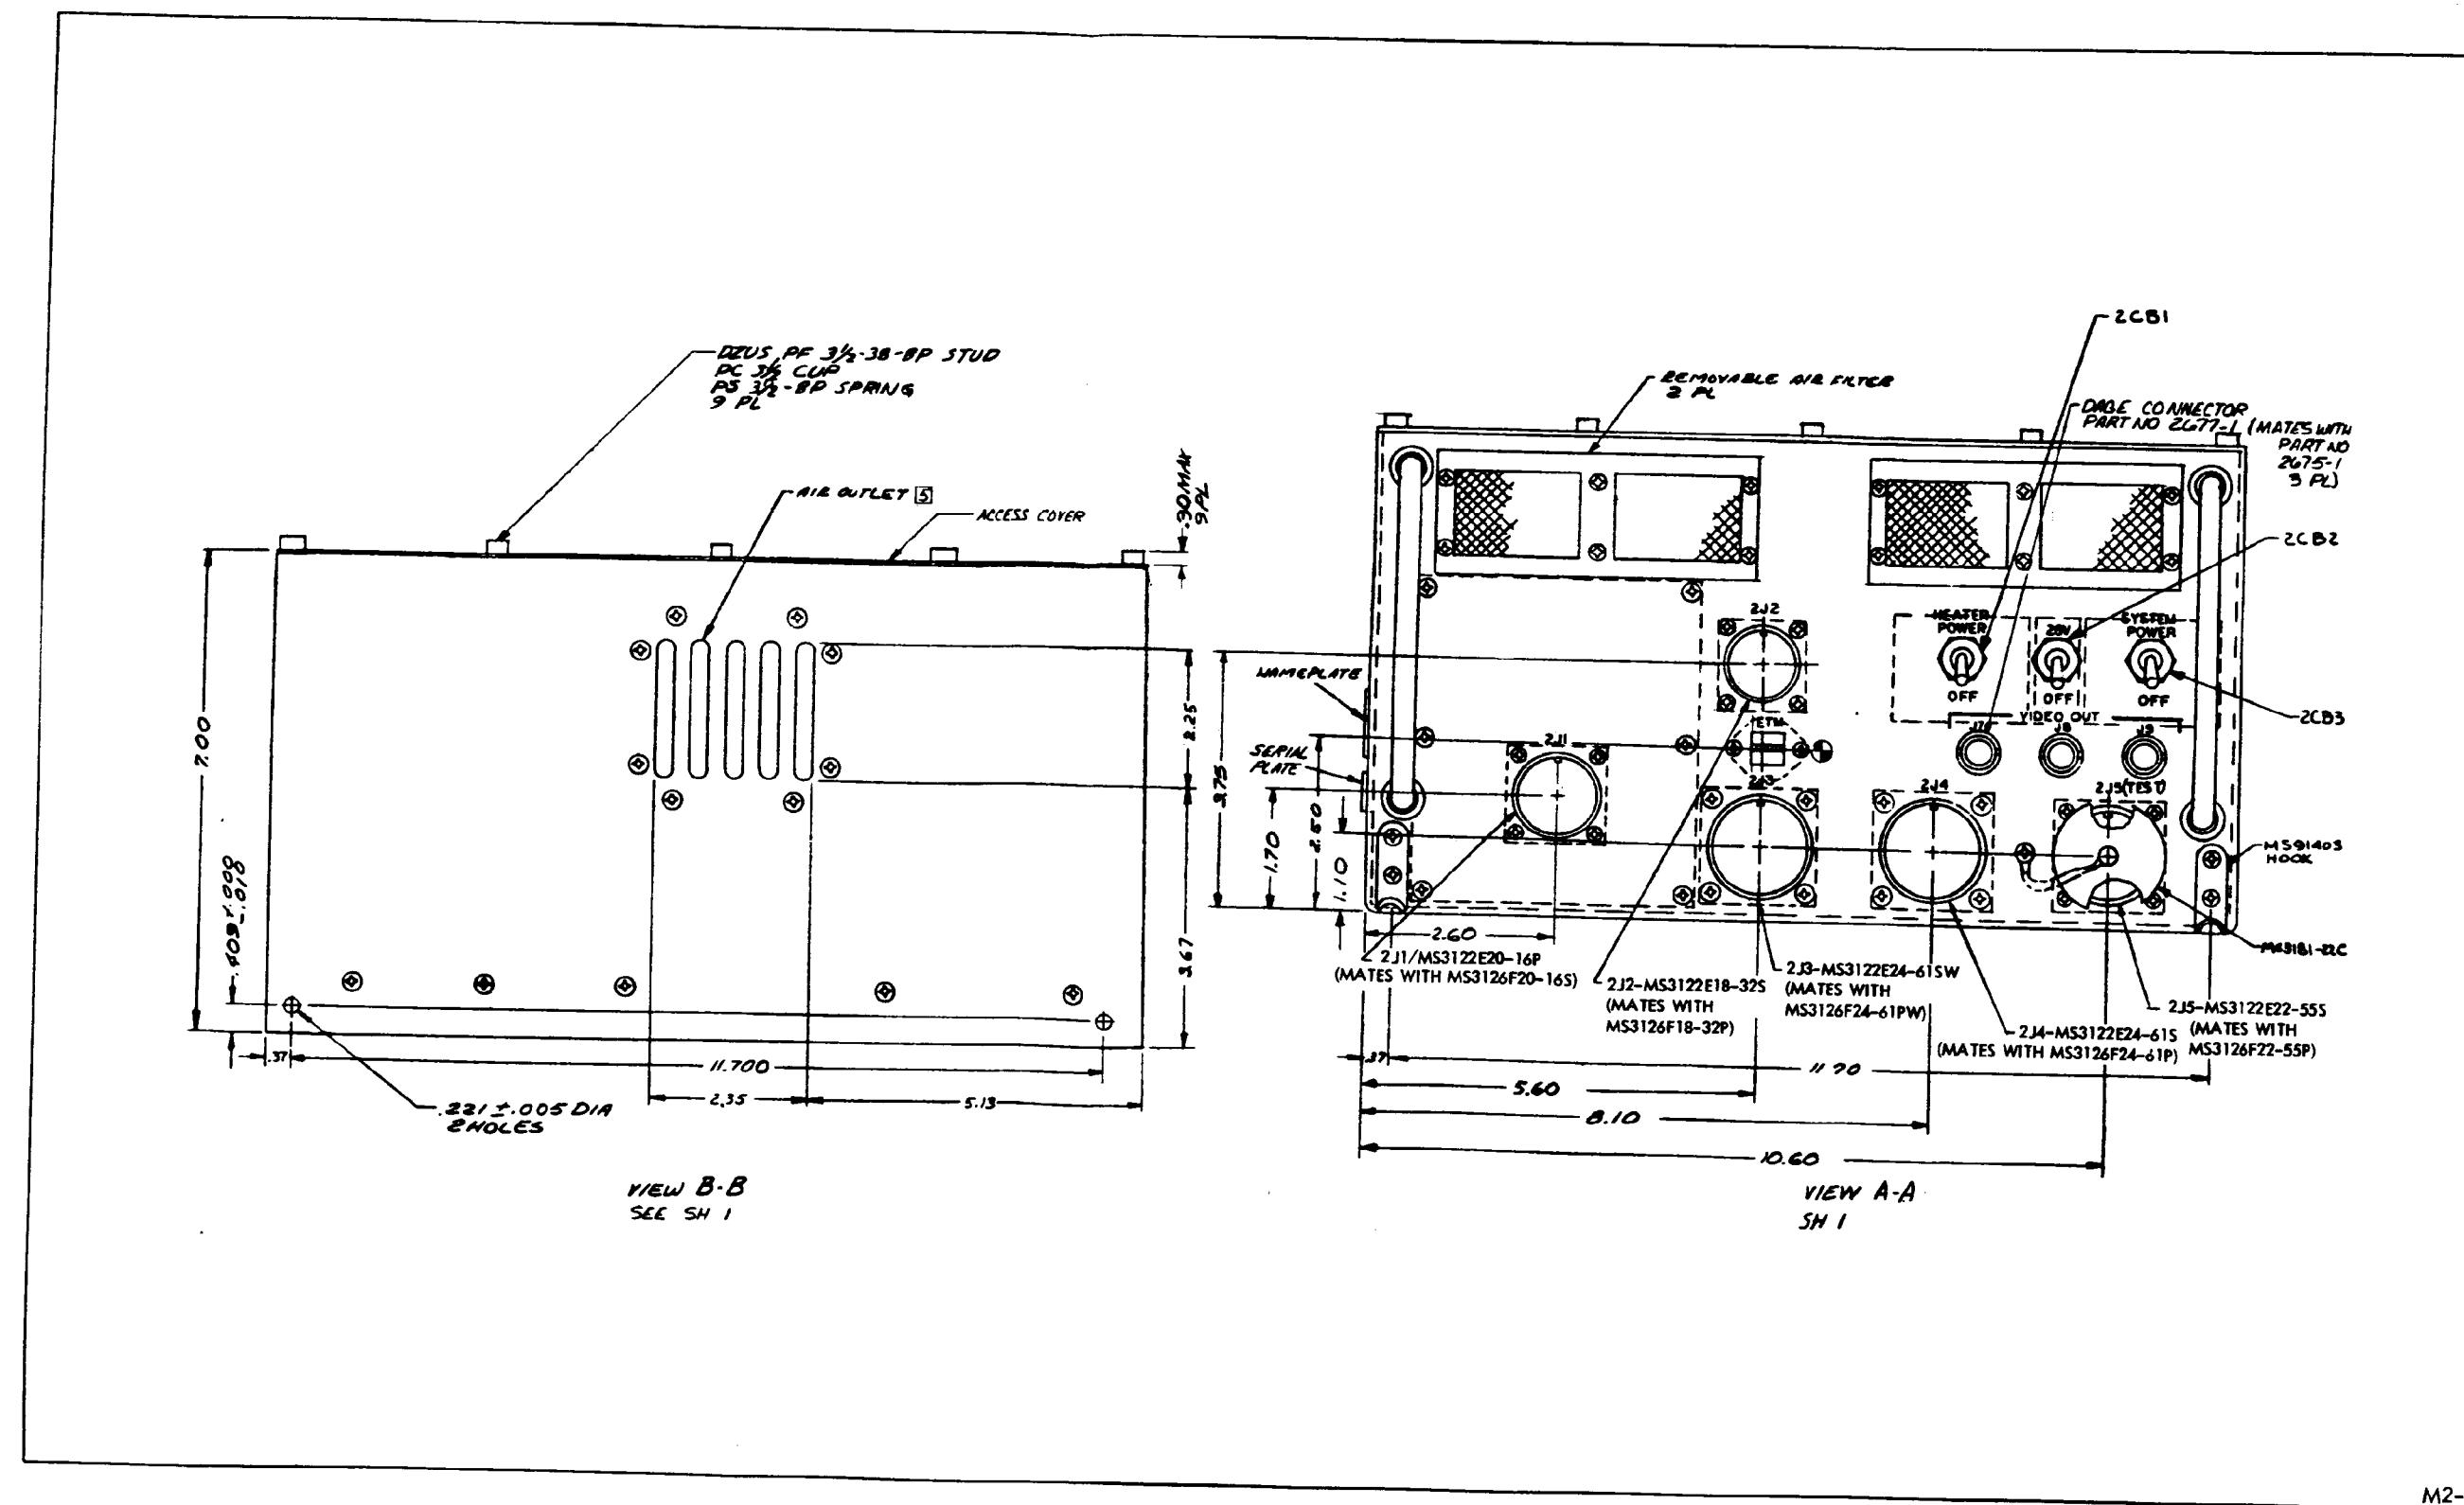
Power supply/video converter, outline drawing. (sheet 2 of 2)
